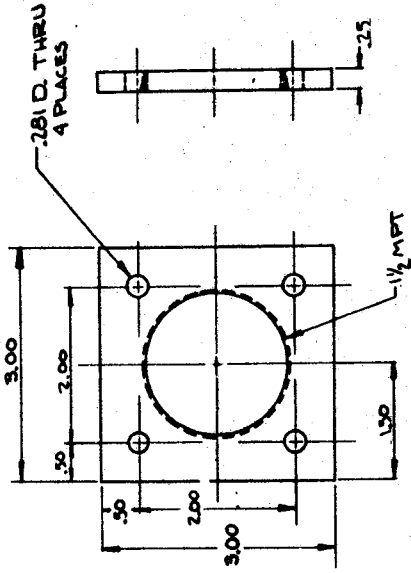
Detail Drawing of Target Assembly Box, Bottom Plate.
